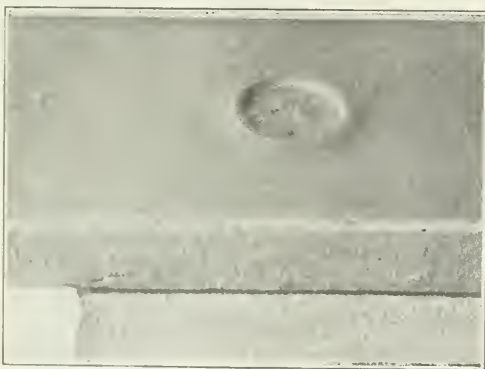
SPOT WELD JOINING TWO STEEL SHEETS
